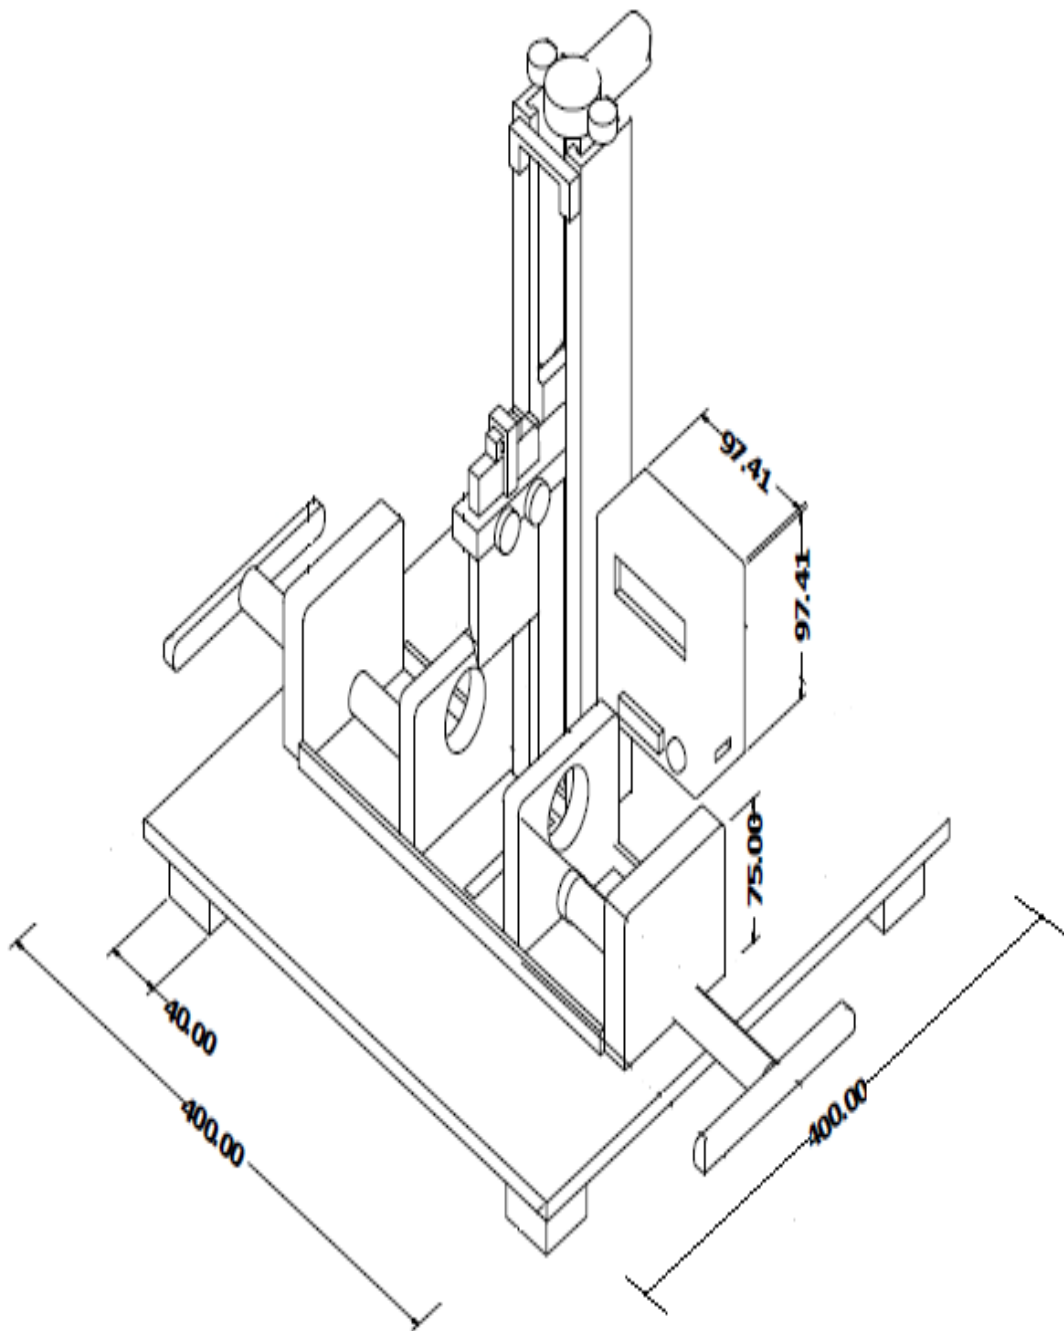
Isometric view of the automated vegetable cutter showing part dimensions
